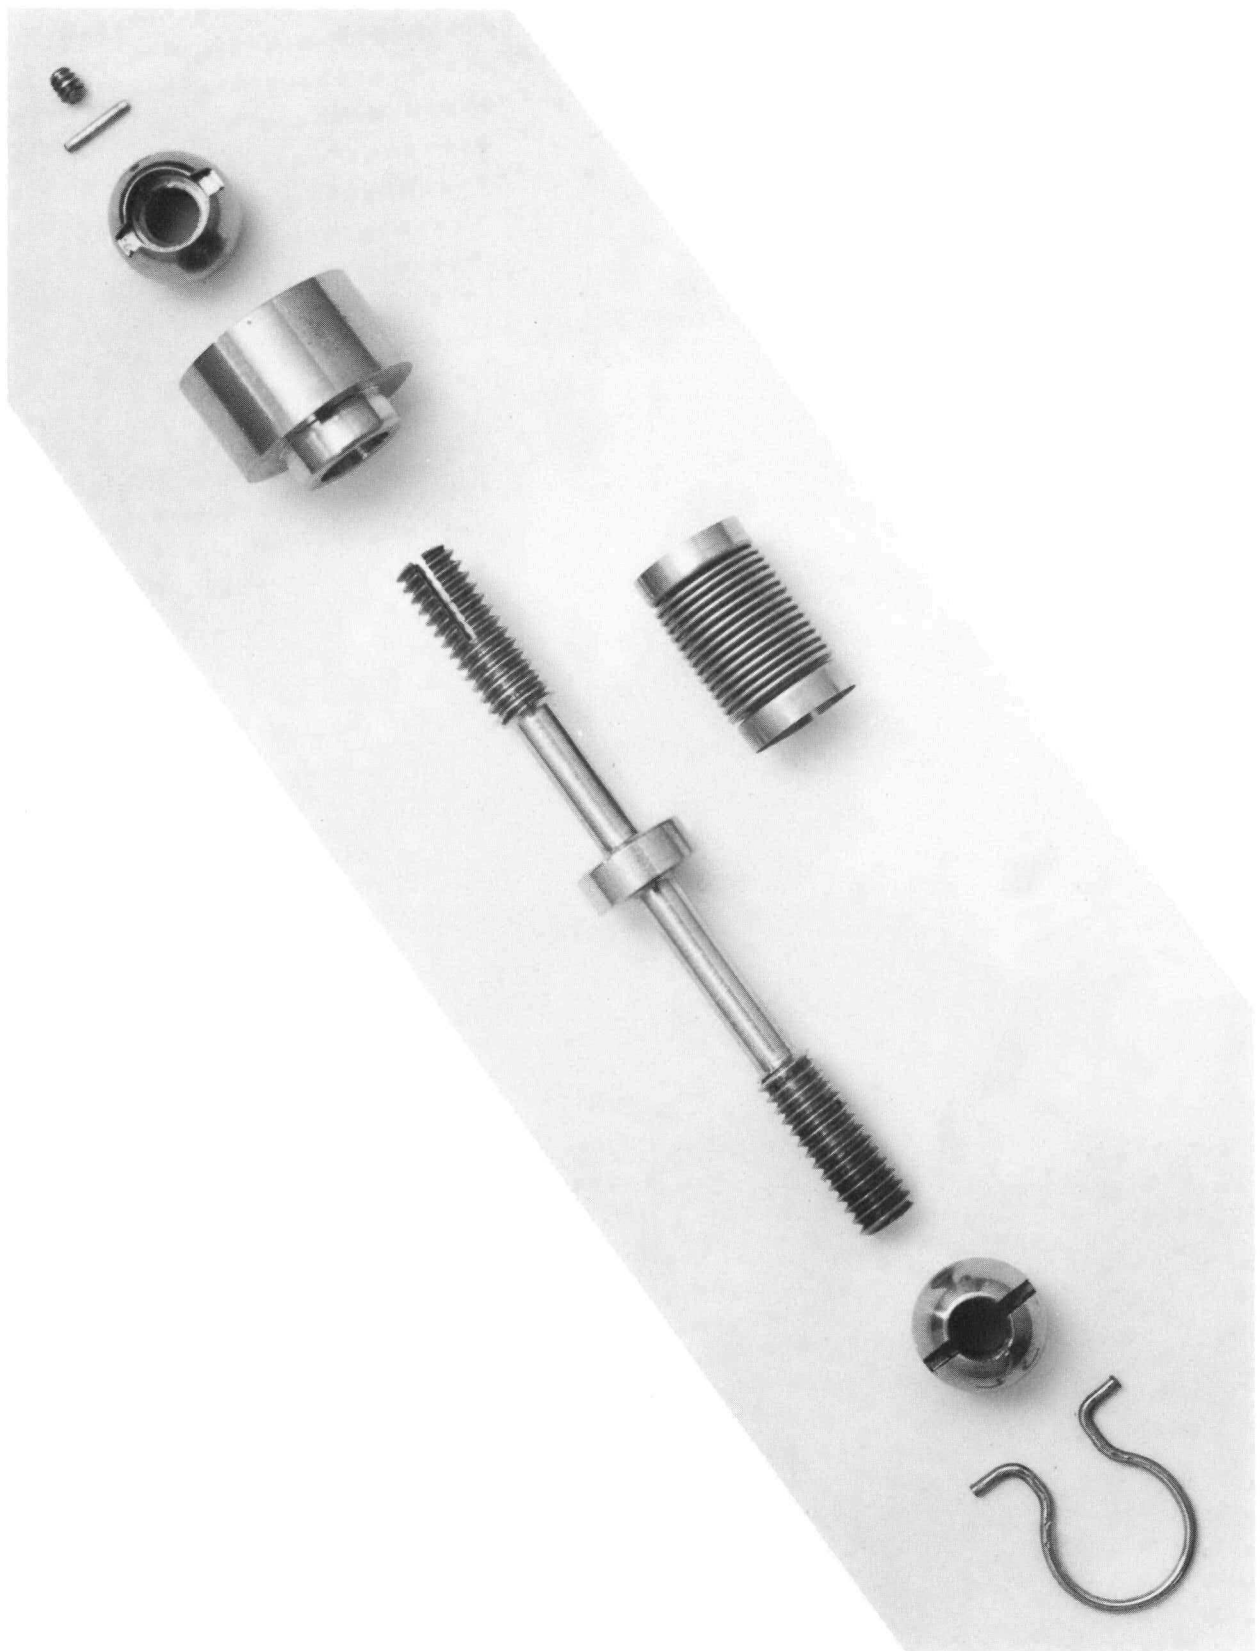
Components Fabricated for Adjustable Tension Rod Development
